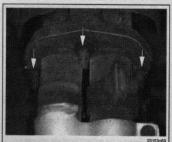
Remove the exhaust pipe-to-exhaust manifold nuts
